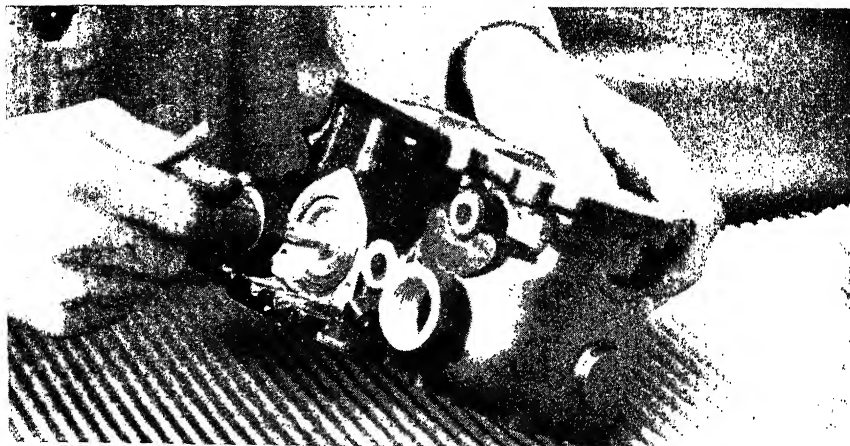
GRINDING IN THE MIXTURE VALVE DURING MANUFACTURE.
